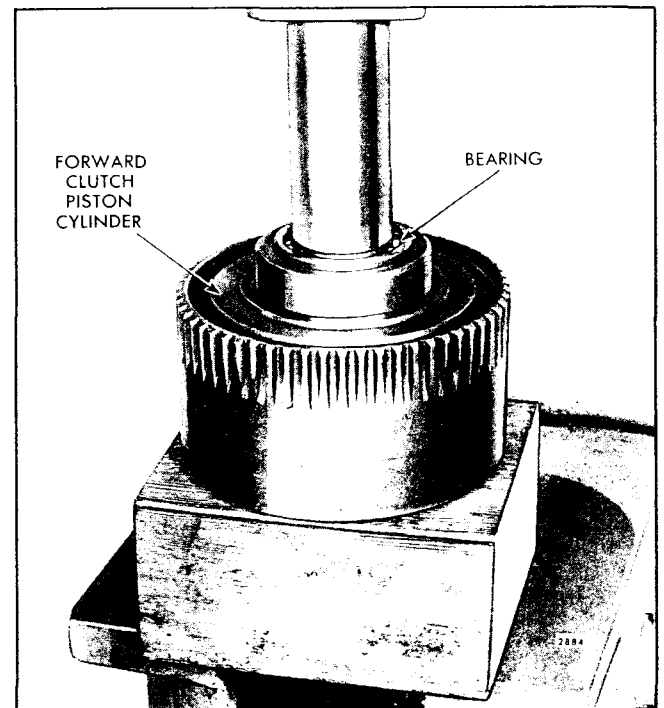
Installing Gear Shaft Bearing in Forward Clutch Piston Cylinder
